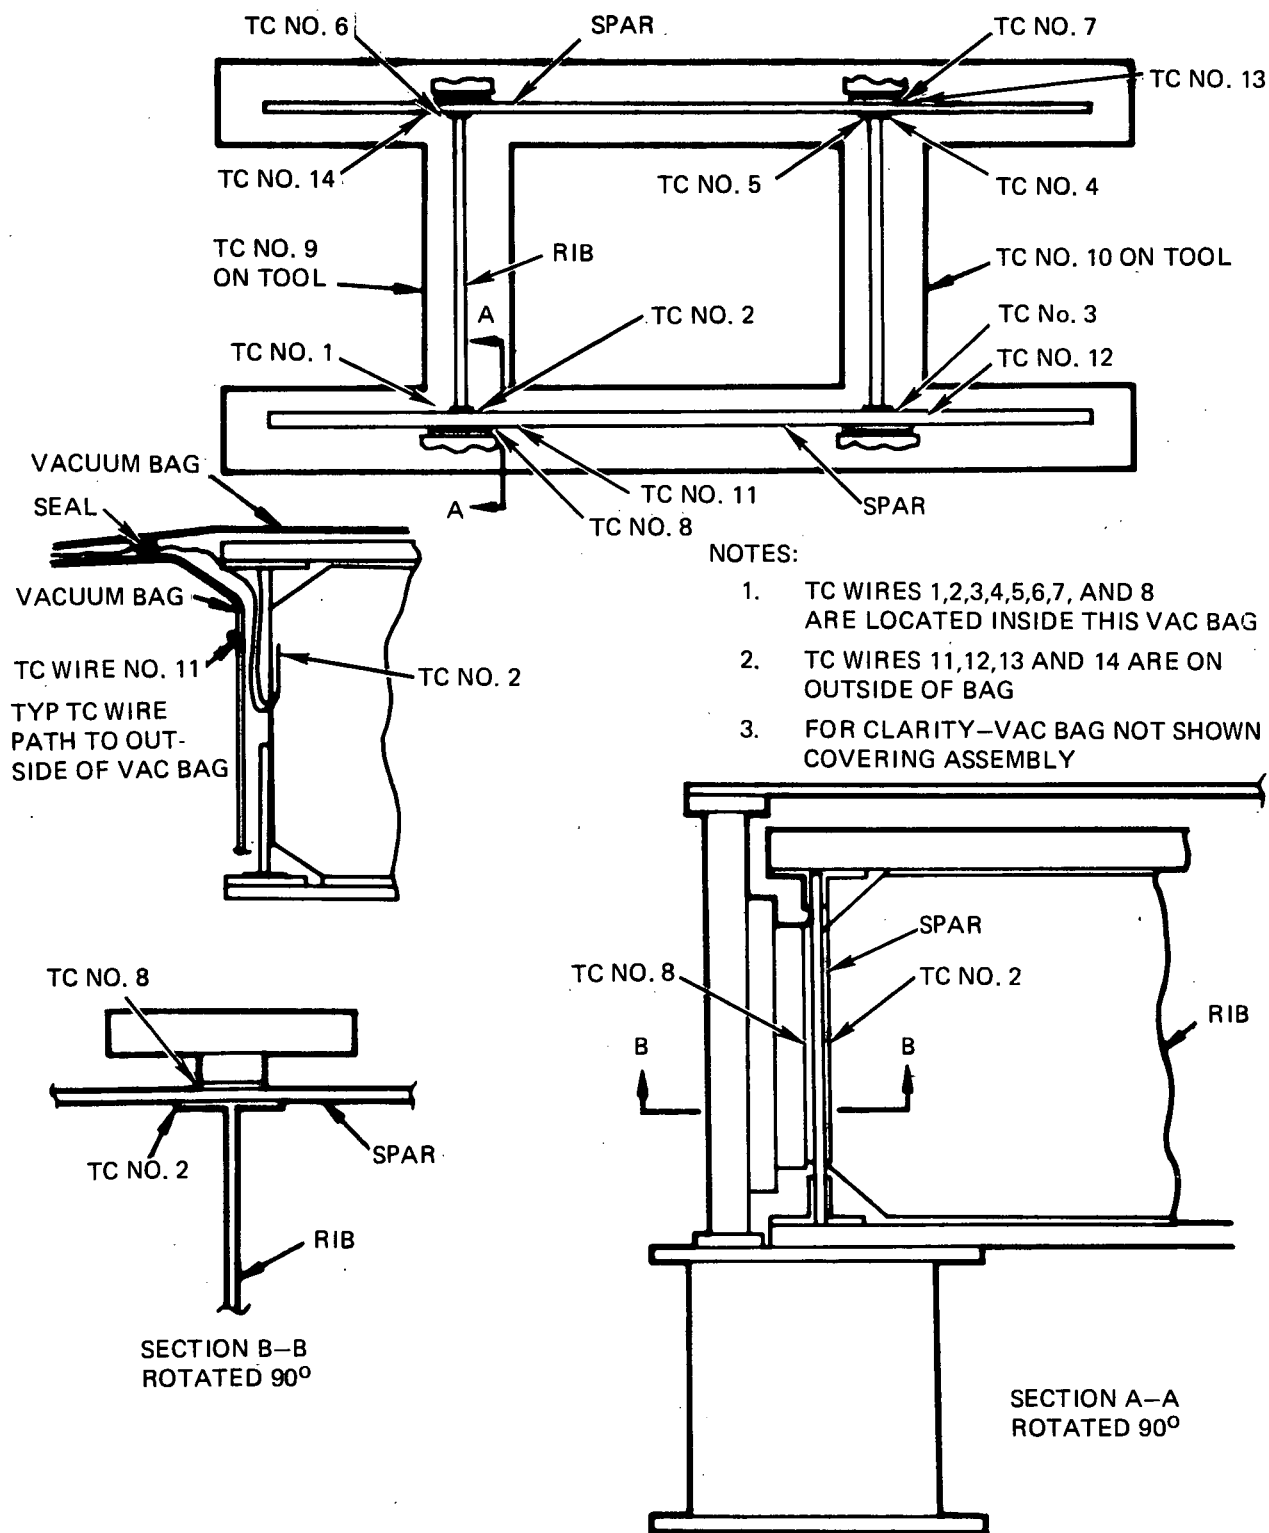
Thermocouple Locations Spar-to-Rib Subassembly
